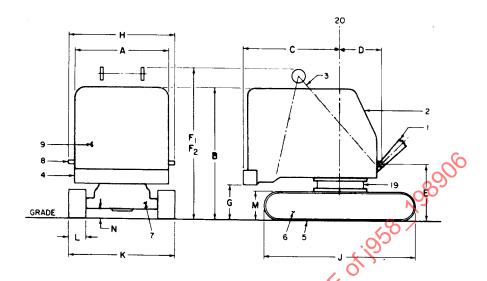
CRAWLER MOUNTING WITH REVOLVING SUPERSTRUCTURE
